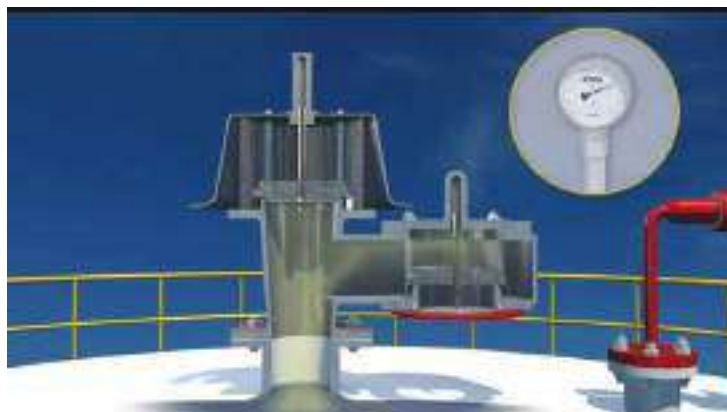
Pressure Vacuum Relief Valve -PVRV
